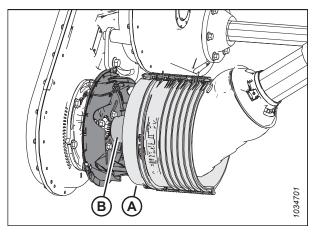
Driveline Installed on Float Module Gearbox Shaft
